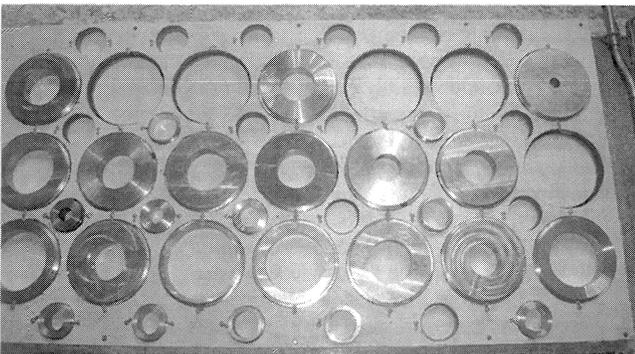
Assortment of Pivot Block Bushings Utilized to Adapt the Various Rotor to the Pivot Block Assembly.
